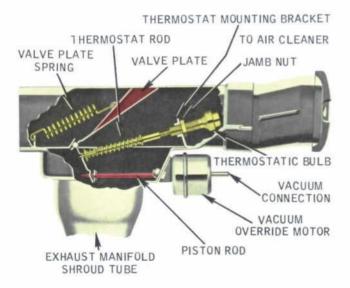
Sectional View of Hot and Cold Air Cleaner Duct and Valve
